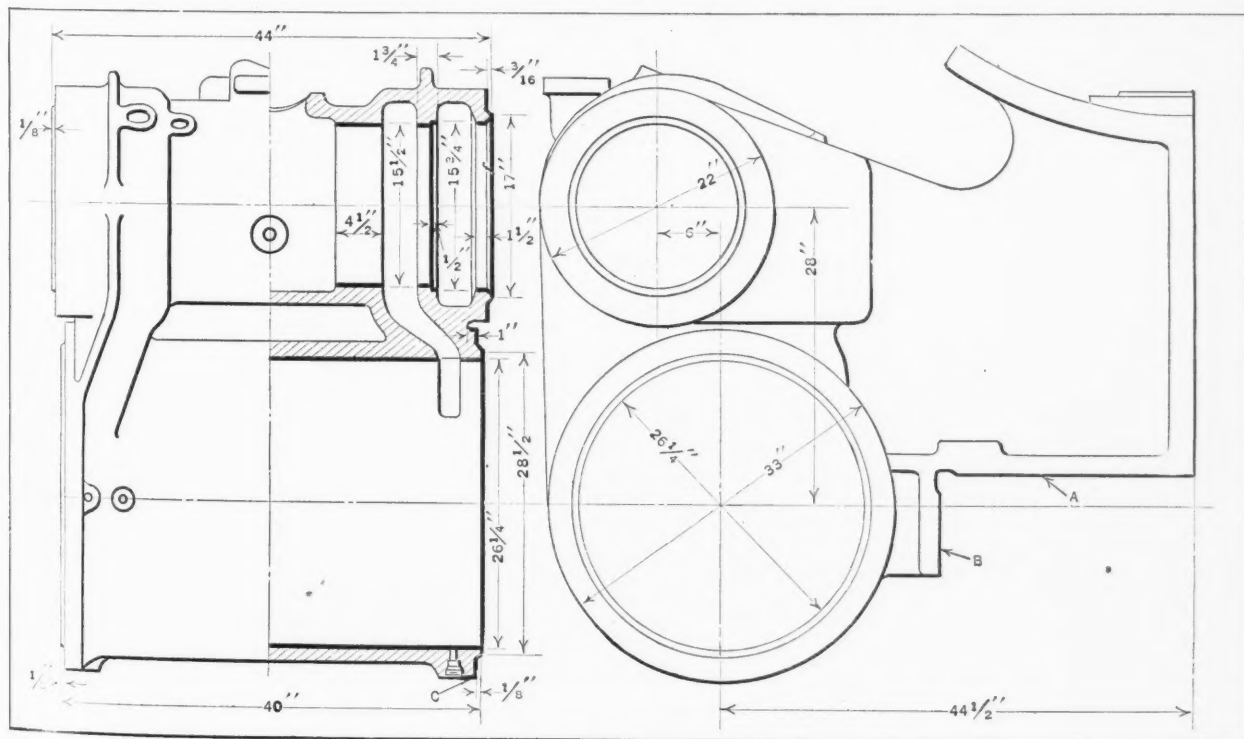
Typical Locomotive Cylinder Bored on Machine Shown in Heading Illustration
